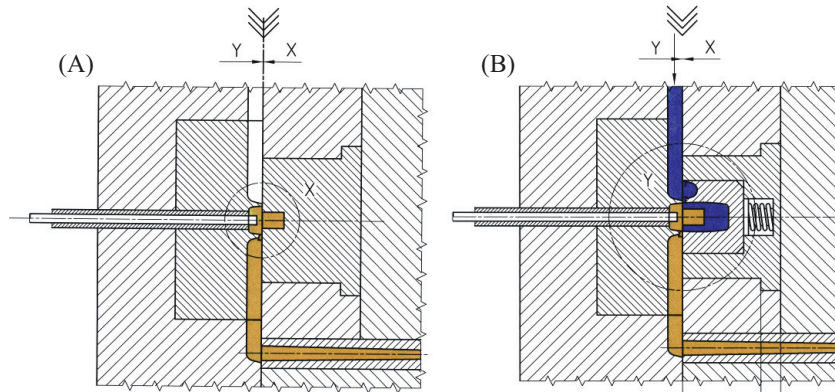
Schematic drawing of the 2-C-MIM mould used for the fabrication of spinal implants. (A) Injection of the feedstock without space holder. (B) Injection of the feedstock with space holder.
